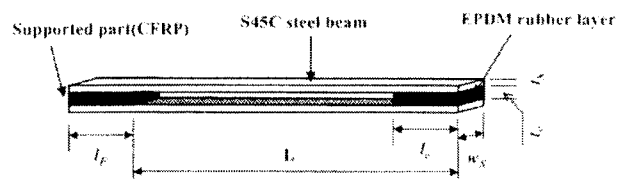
Geometry of a double cantilever sandwich beam specimen
